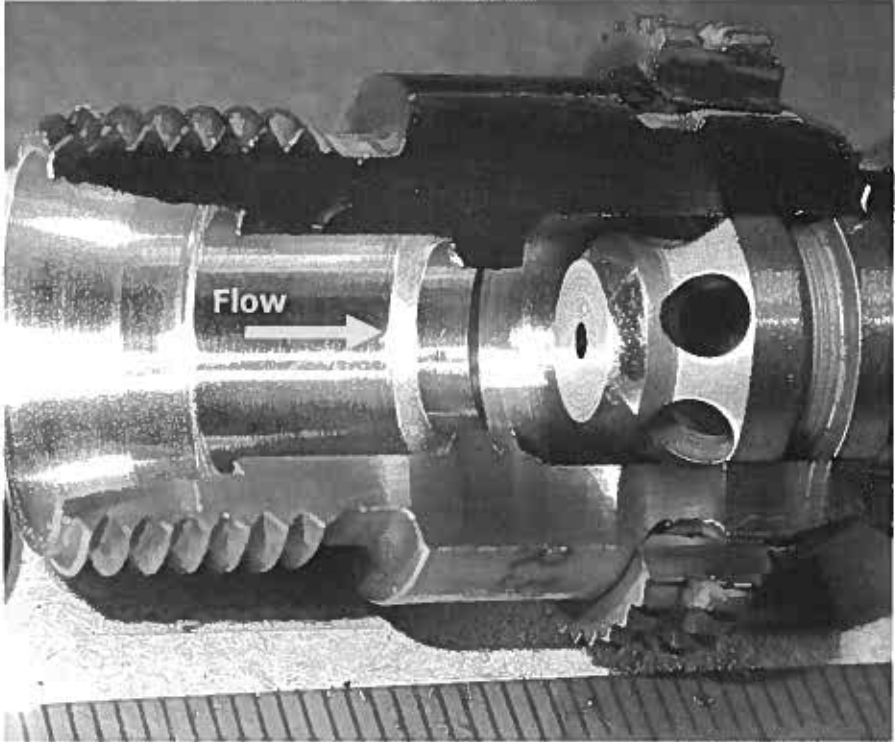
Cut-away view of back flow restrictor valve in open position (during landing gear retraction).
